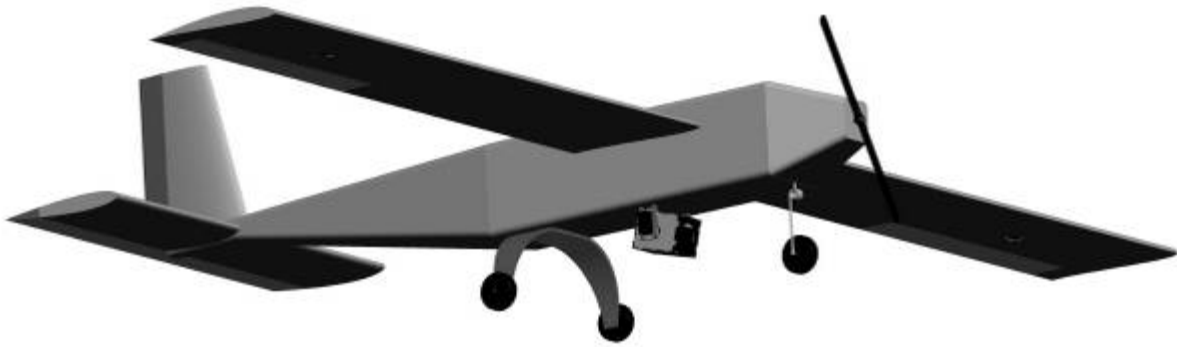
Pro Engineer CAD drawing of the final design of our UAS
